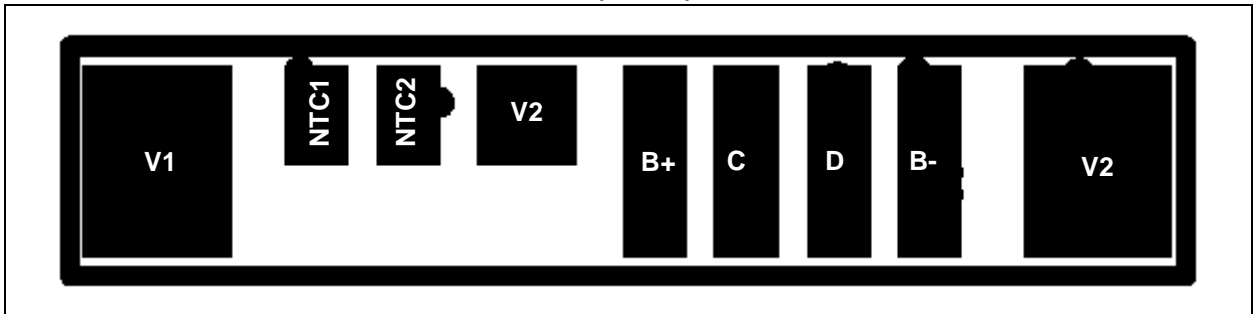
PS7052 BOARD ASSEMBLY (SIDE 2)
